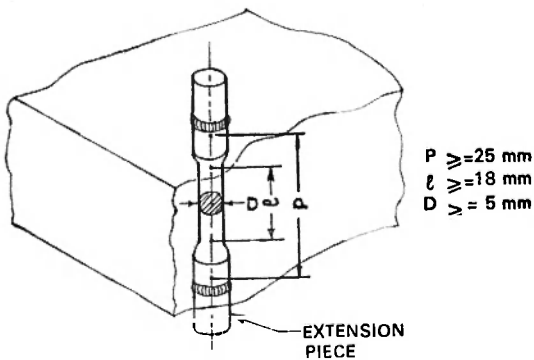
SPECIMEN FOR THROUGH THICKNESS TENSILE TEST WITH EXTENSION PIECES
